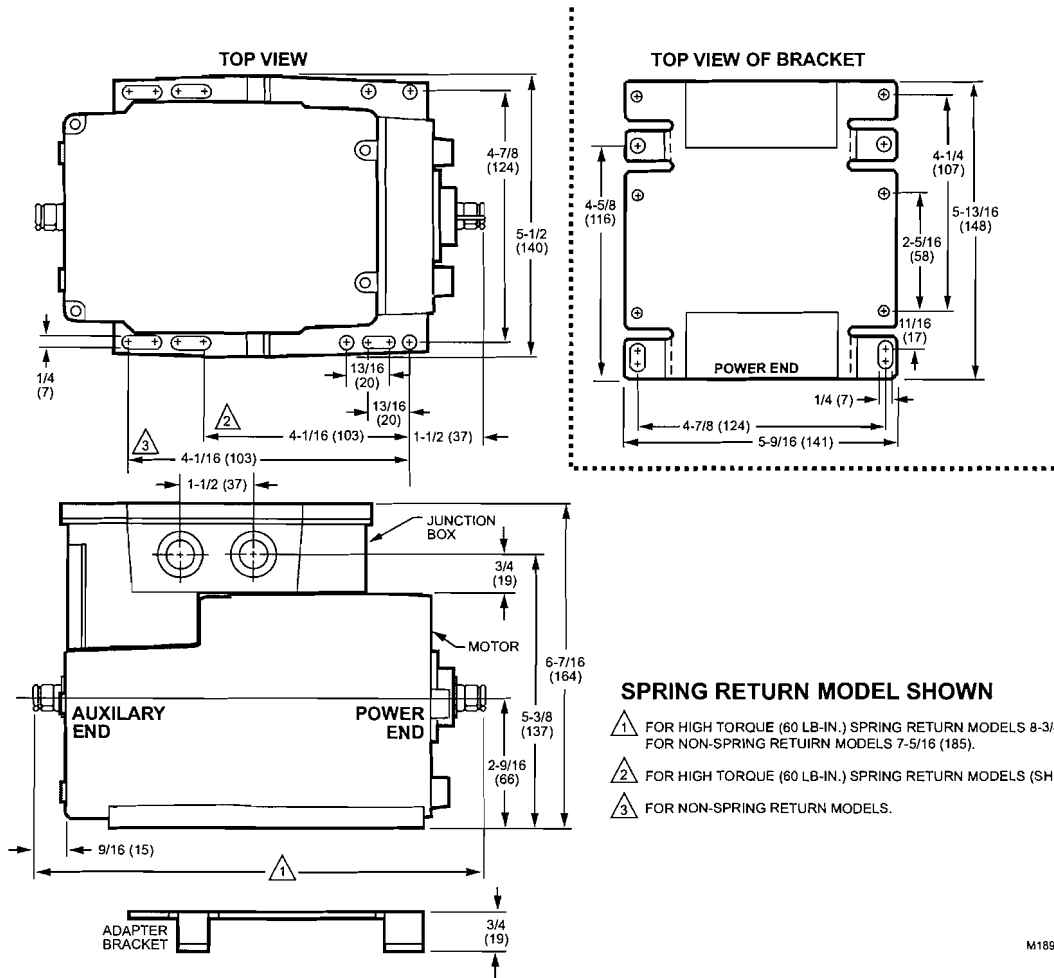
Modutrol IV Motor mounting dimensions in inches (mm).
